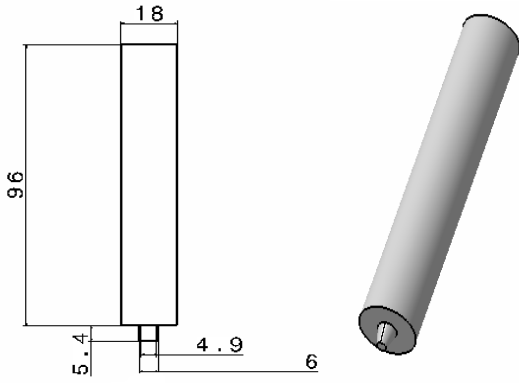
2D & 3D models of FSW tool with Threaded Conical Pin
